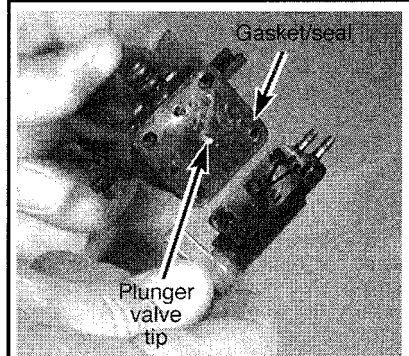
Install the cover using a new gasket, properly locating it over the valve tip
